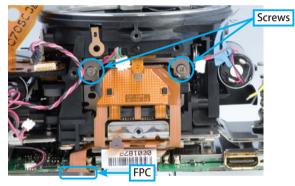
Position of Screws and FPC of AF FPC Ass'y (Bottom)
